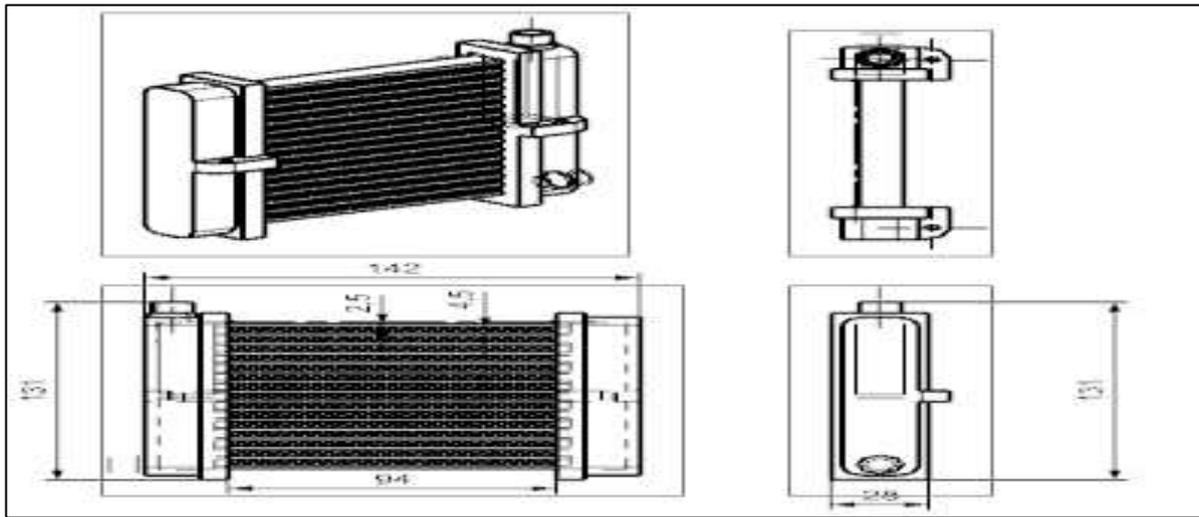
Design of Flat Plate Microchannel Heat Exchanger
